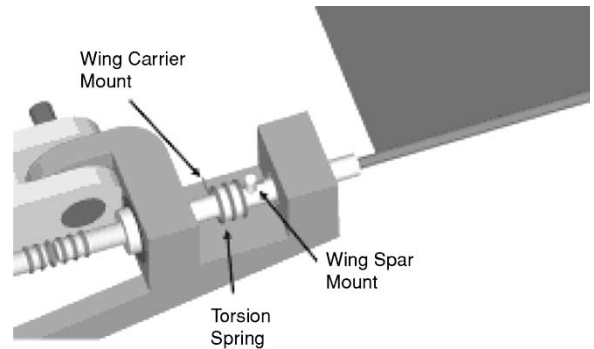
Details of the torsion spring. The torsion spring attaches to the wing spar mount at one end and the wing carrier at the other. The spring creates a moment that acts to return the wing to its fully pronated position.
